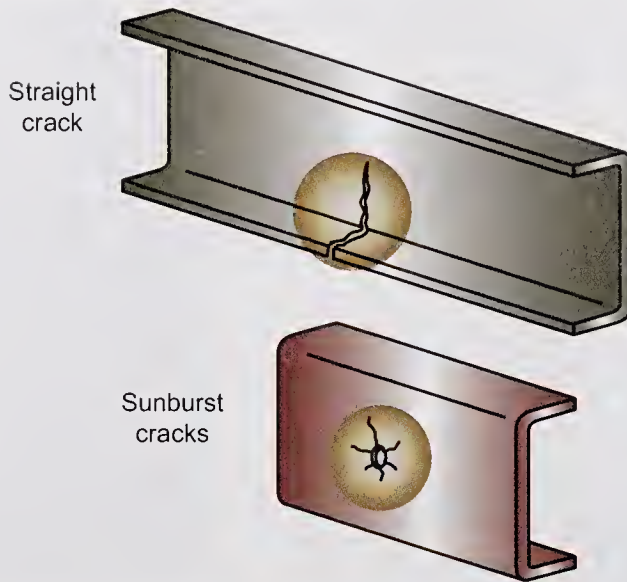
Straight cracks may occur in the frame flange; sunburst cracks may radiate from a hole in the frame web or cross member.
